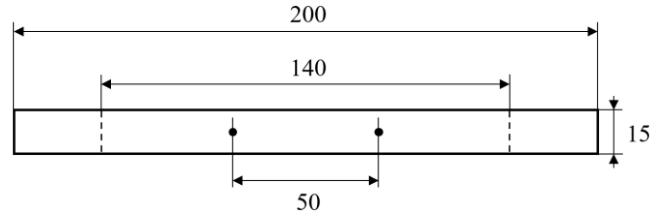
Tensile specimen design from ASTM D3039 with adapted dimensions, expressed in millimeters.
